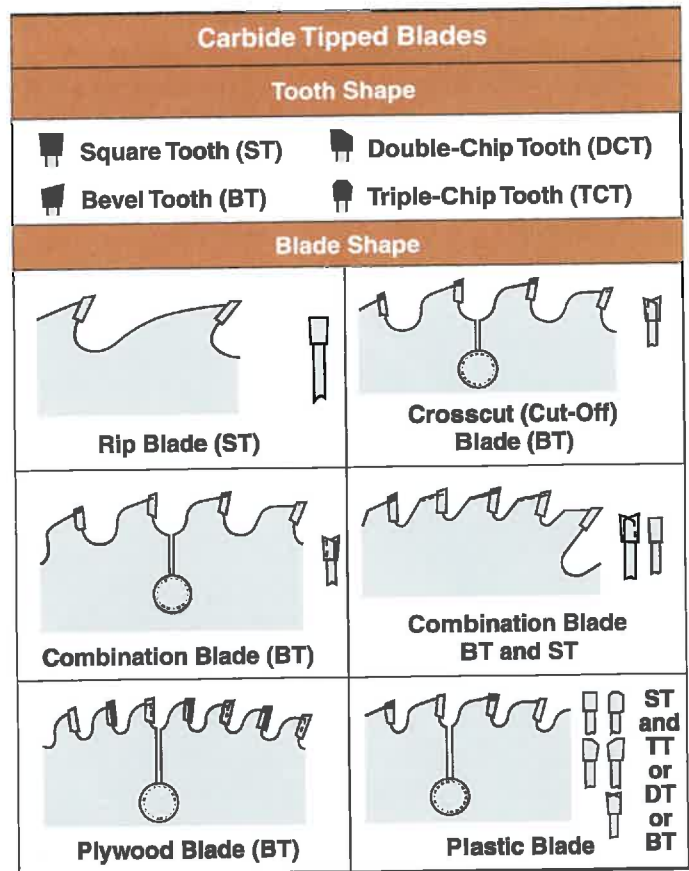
Tough, long lasting tungsten carbide-tipped blade out-perform standard blades. (Peerless)
